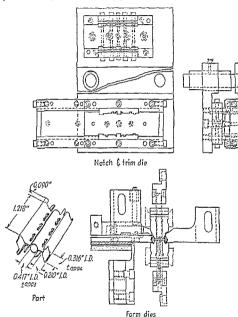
Tools for producing radio-tube plates on a multiple-slide press, 50
